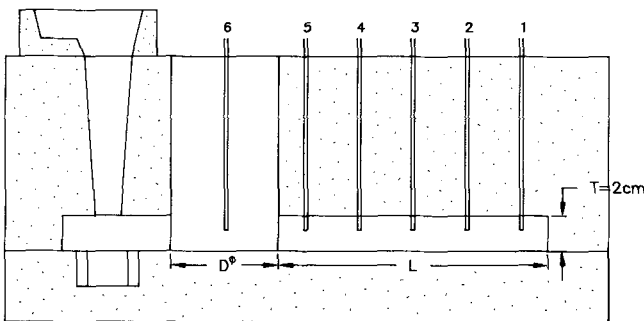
Nomenclature of castings and arrangement of thermocouples in an assembled mold.
